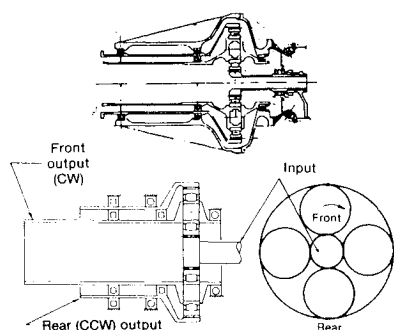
Differential planetary in-line counter-rotation gearbox concept.
